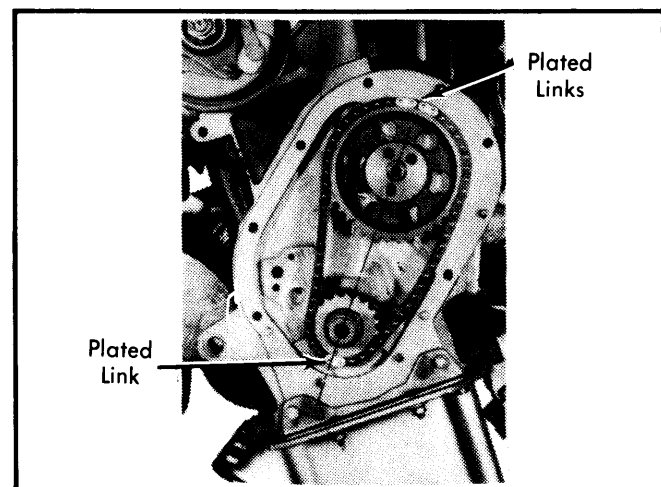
Proper Alignment of Camshaft and Crankshaft
